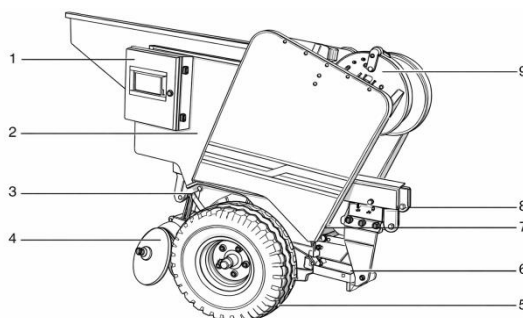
Schematic diagram of the electric-driven seeder assembly
